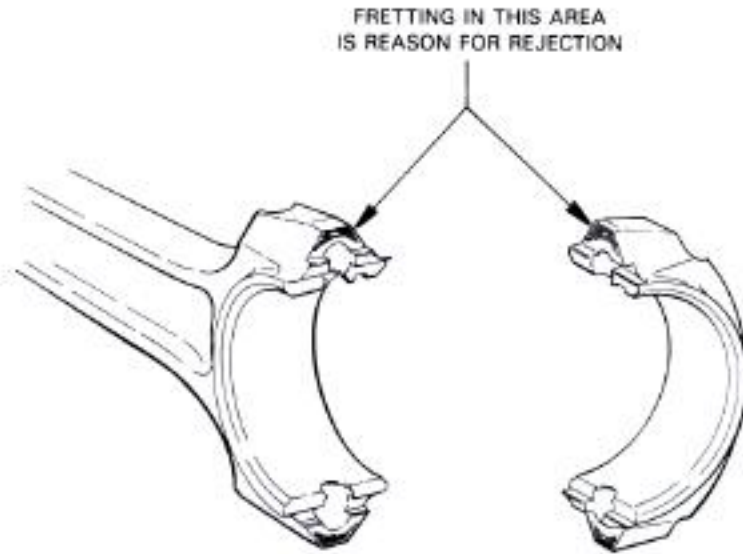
Connecting Rod and Cap Showing Damage by Fretting
